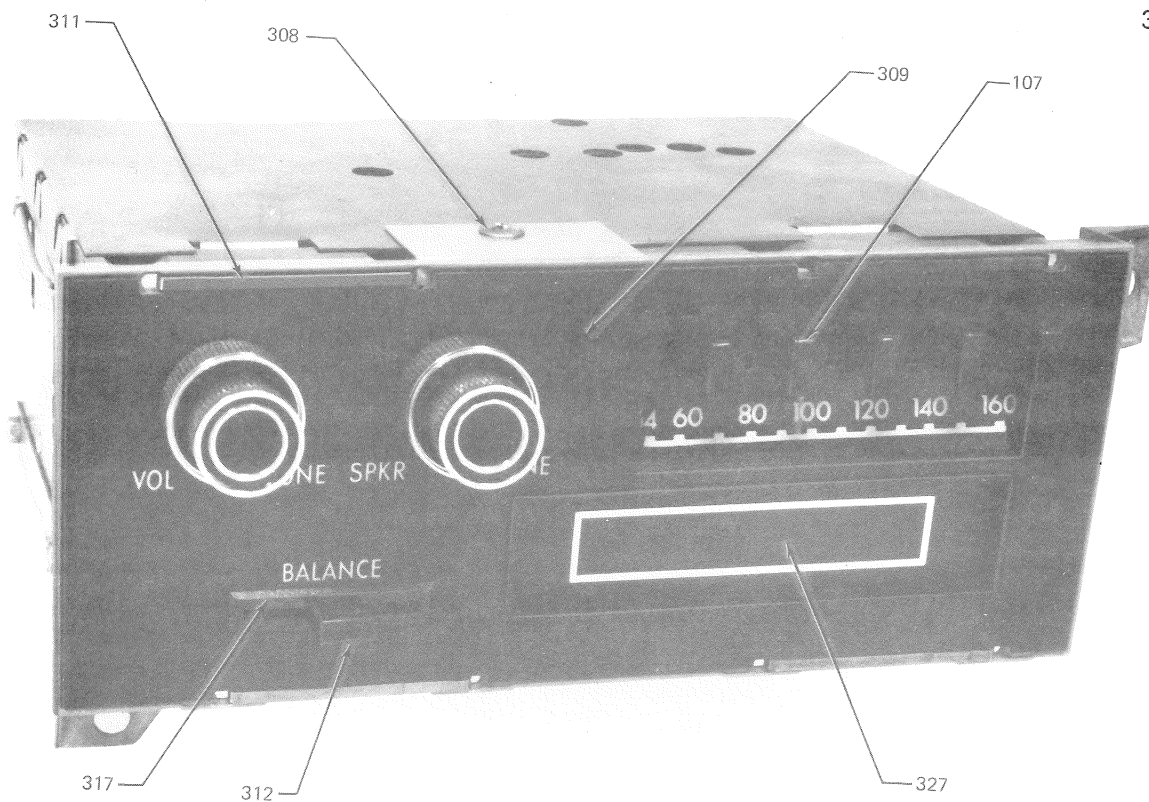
PARTS LOCATION, FRONT VIEW (3501457)
